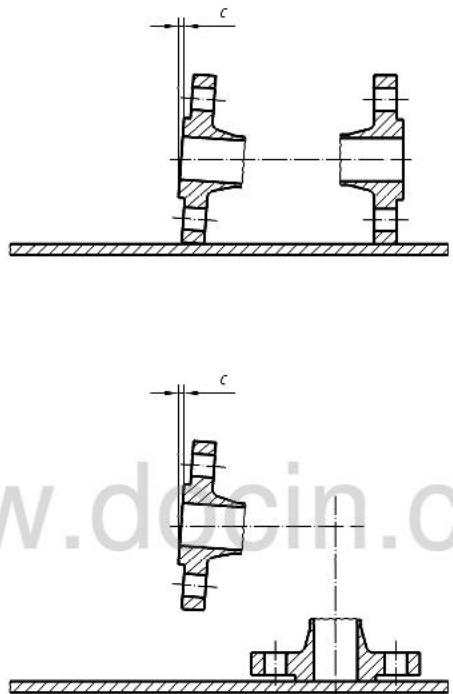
Tolerances on parallelism and perpendicularity
